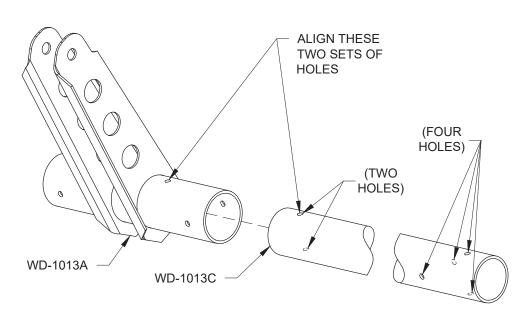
ASSEMBLE FLAP CRANK AND FLAP TORQUE TUBE
